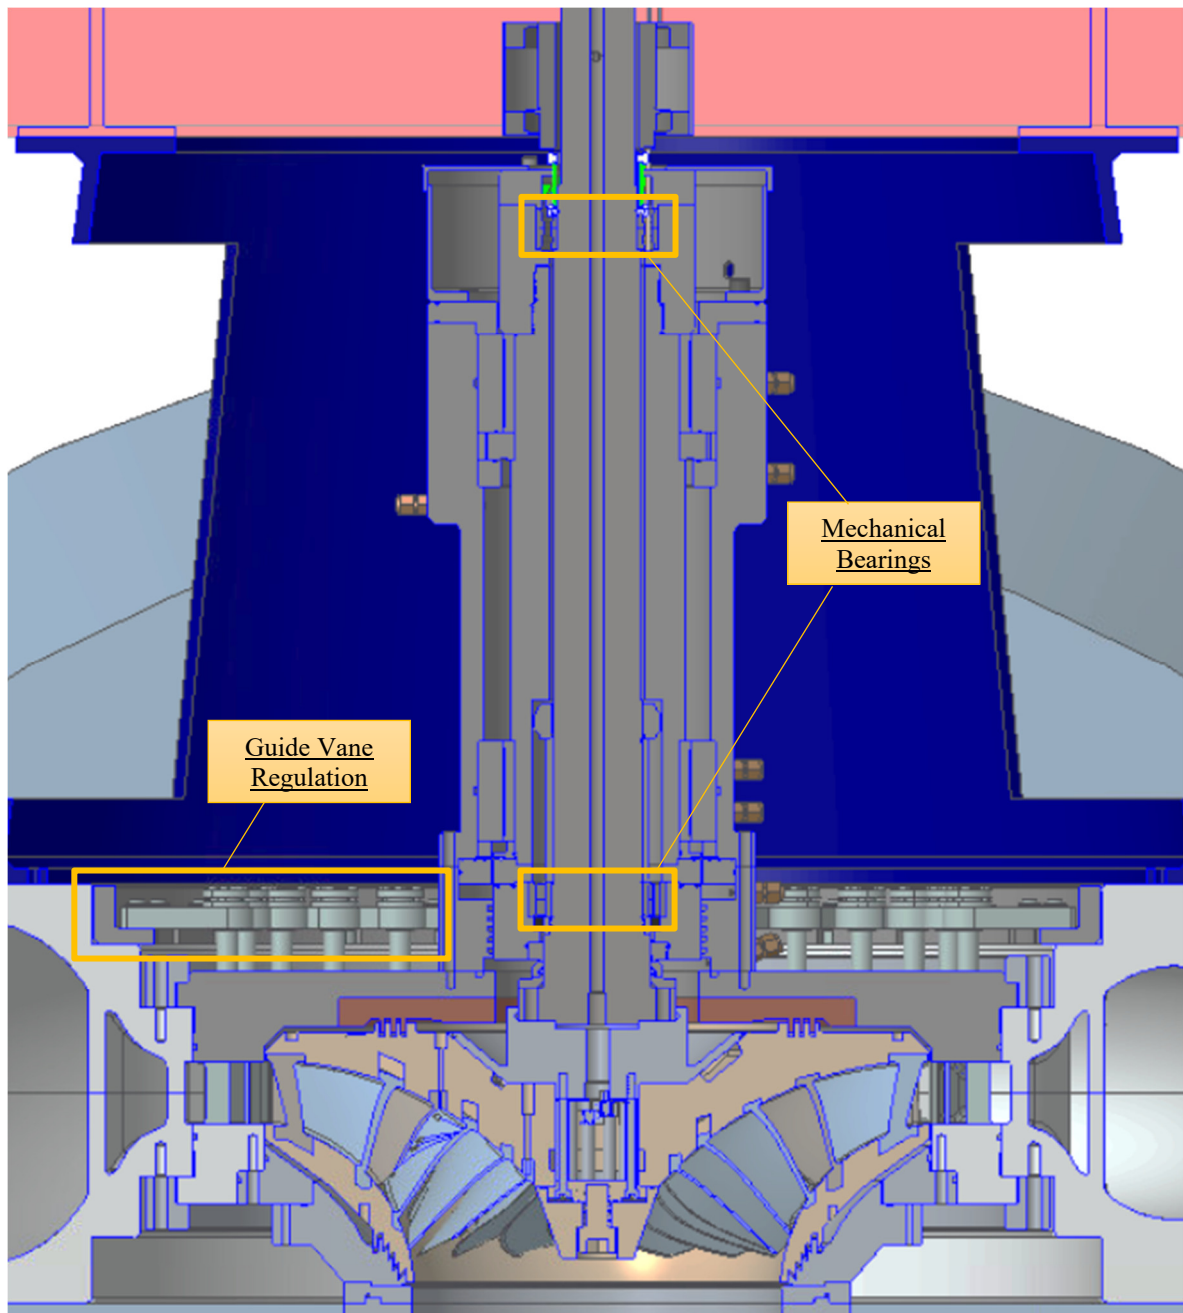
VKL Francis Test Rig; Cross-sectional View
